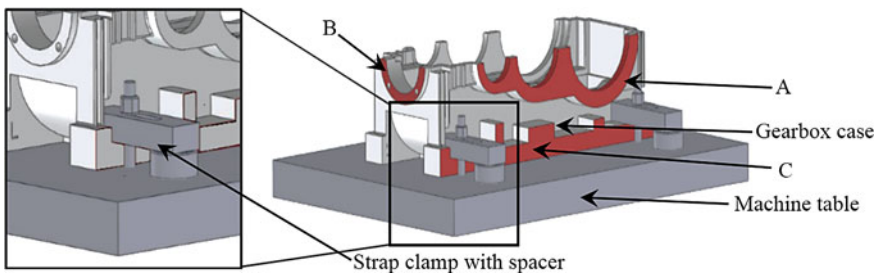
Helical gearbox case clamp on machine table using strap clamp
